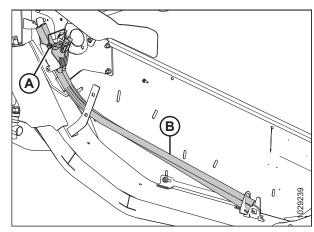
Divider Rods in Storage Location at Right Header Endsheet
